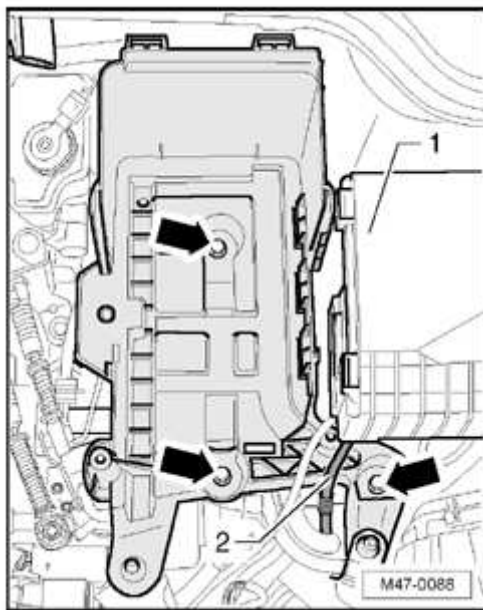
Identifying Cover Of E-Box, Wire & Bolts
